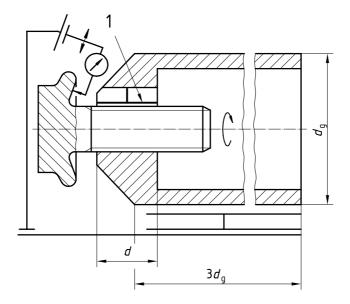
measuring device for verifying perpendicularity (total run-out) specified in Figures 51, 52, 53, 55, 102 and 103
